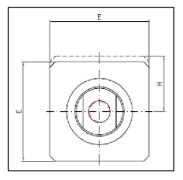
Actuator base dimensions. Source: http://www.eurohidraulics.com.br/
